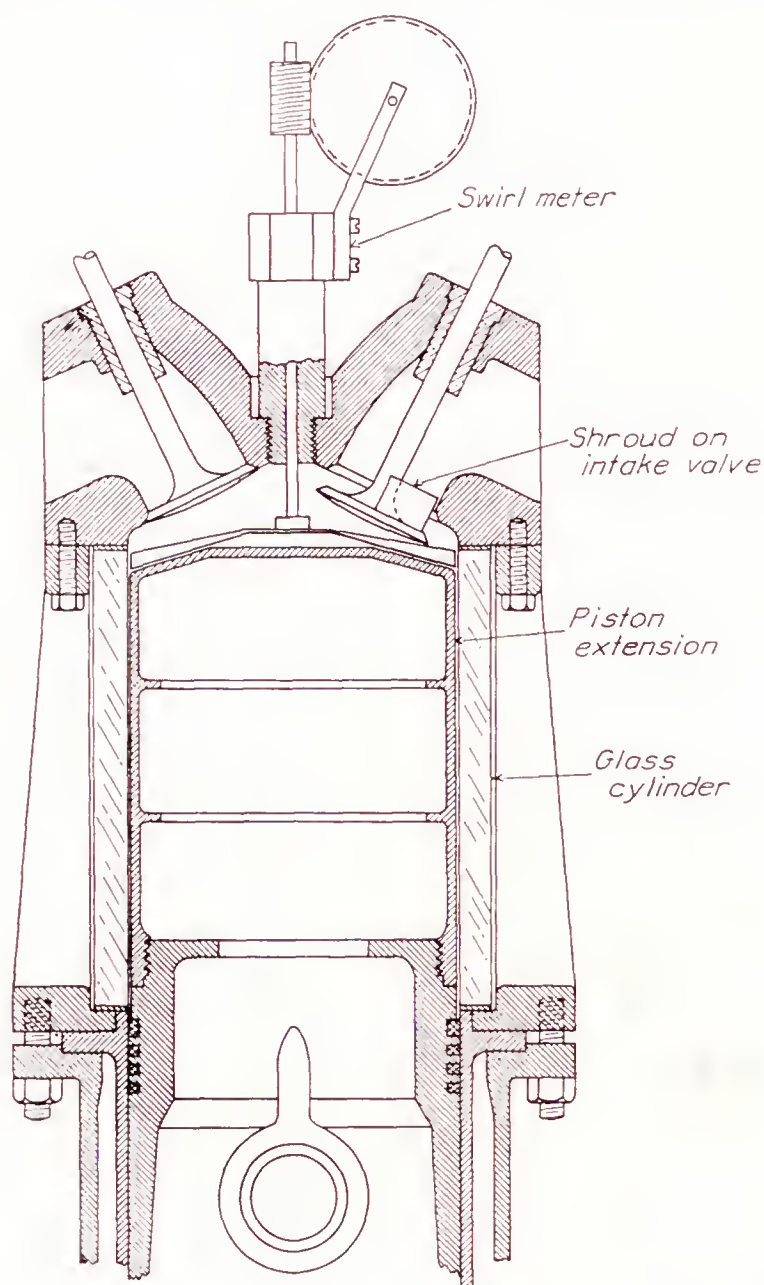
Sketch showing glass cylinder and cylinder head.
